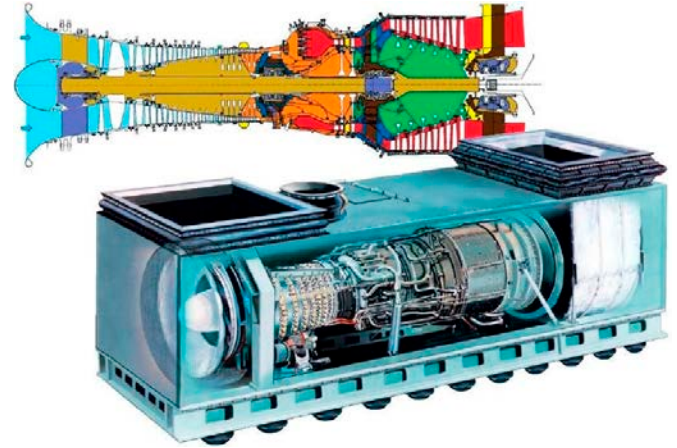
Gas turbine manufactured by GE, type LM2500, mounted in thermal and acoustic isolated enclosure [6]
